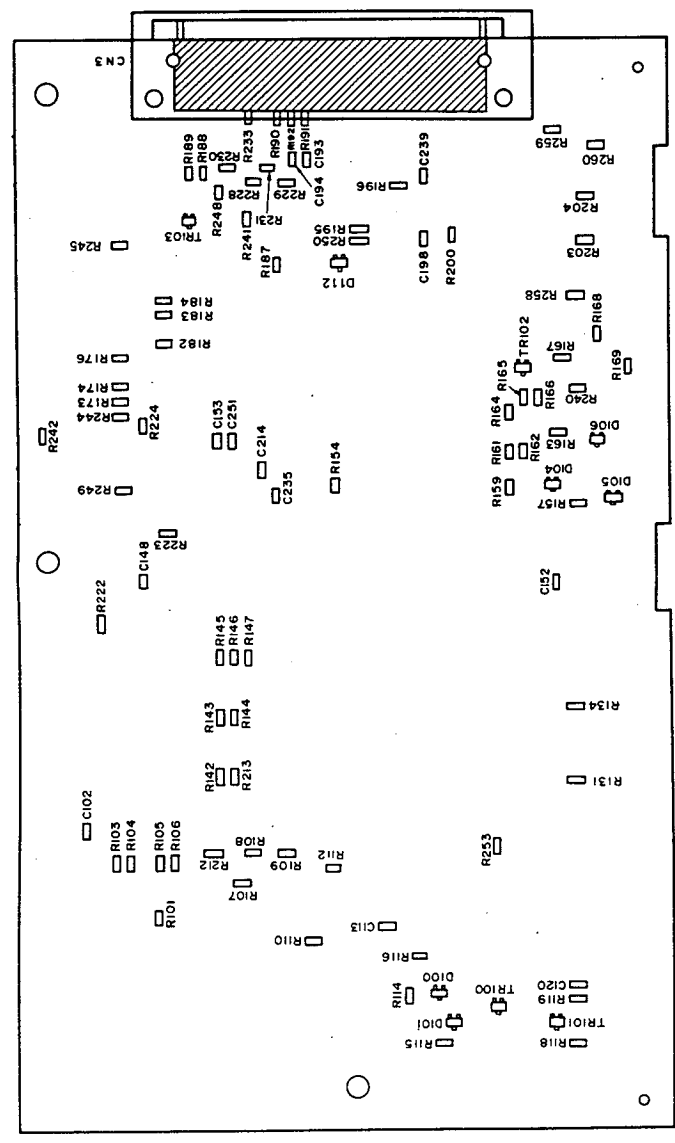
SLMC – 5 Printed-Circuit Board (4YA4021-1001Gxxx) 2/2 (4/4)
